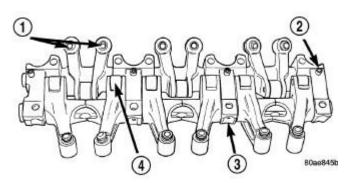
Assemble Rocker Arms and Shaft Courtesy of CHRYSLER LLC
